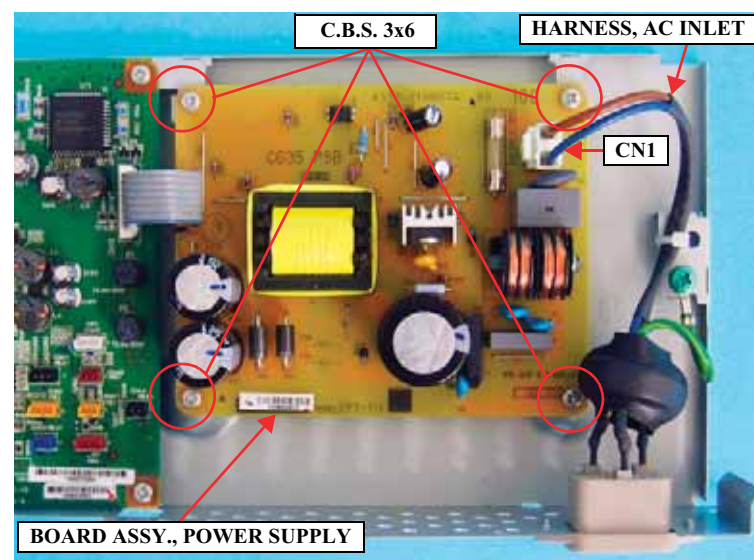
Removing the BOARD ASSY., POWER SUPPLY
